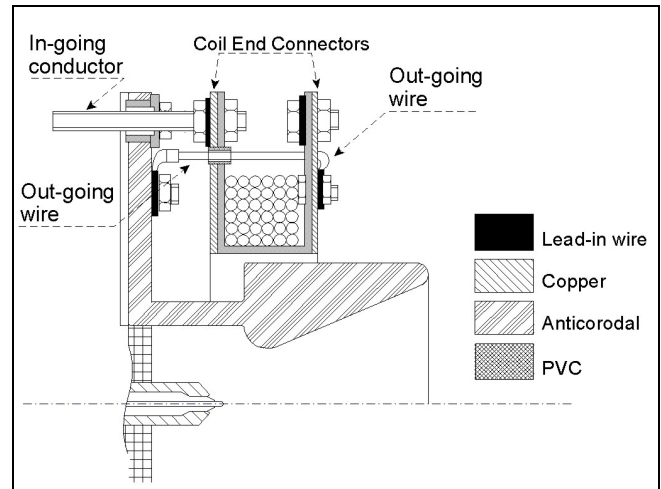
Sketch of a partial view of the short coil mounted on the thruster.
